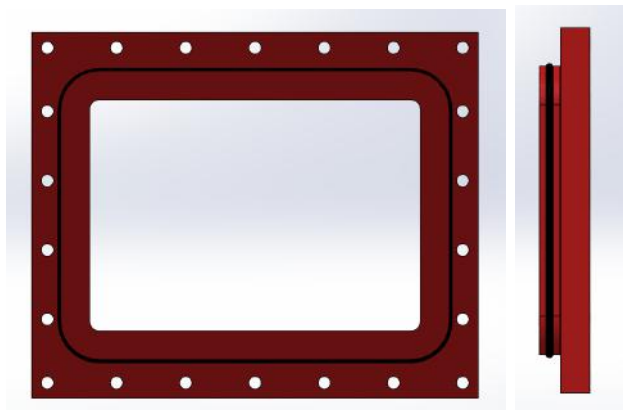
Exterior frame and O-ring joint seated in the frame groove.
